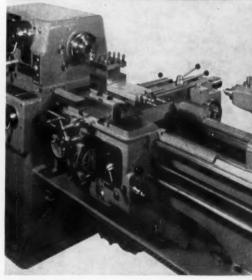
Front view of same lathe equipped with semi-automatic screw-cutting attachment.
